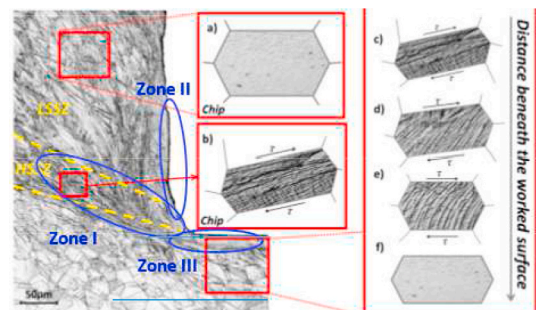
The deformation mechanisms in chip and machined surface in orthogonal cutting [116].
